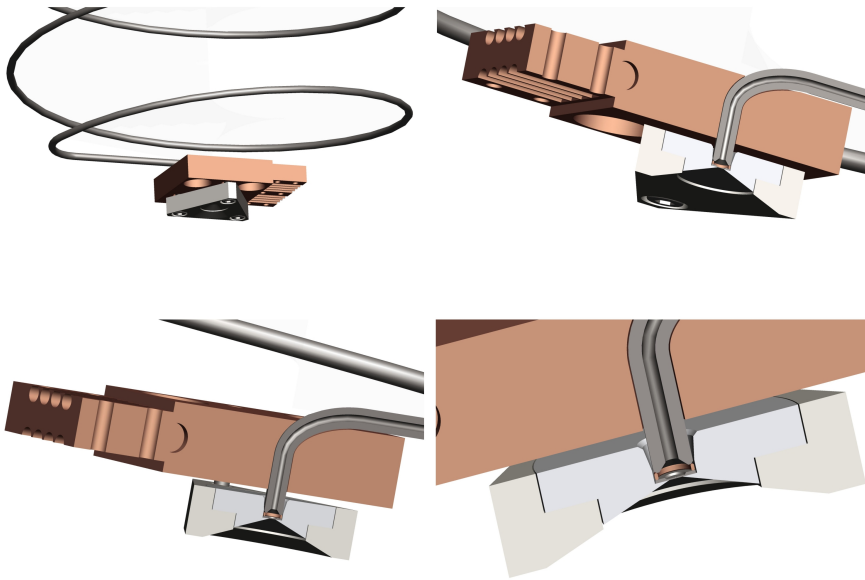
Scheme of the assembled nozzle. Top left: assembled nozzle; top right, bottom left, bottom right: 3D half section scheme of the assembled nozzle. Note: the vacuum and high pressure tight sealing takes place between the *nozzle disc* (1), the *chopper gasket* (4) and the *high pressure gas tube* (5).
